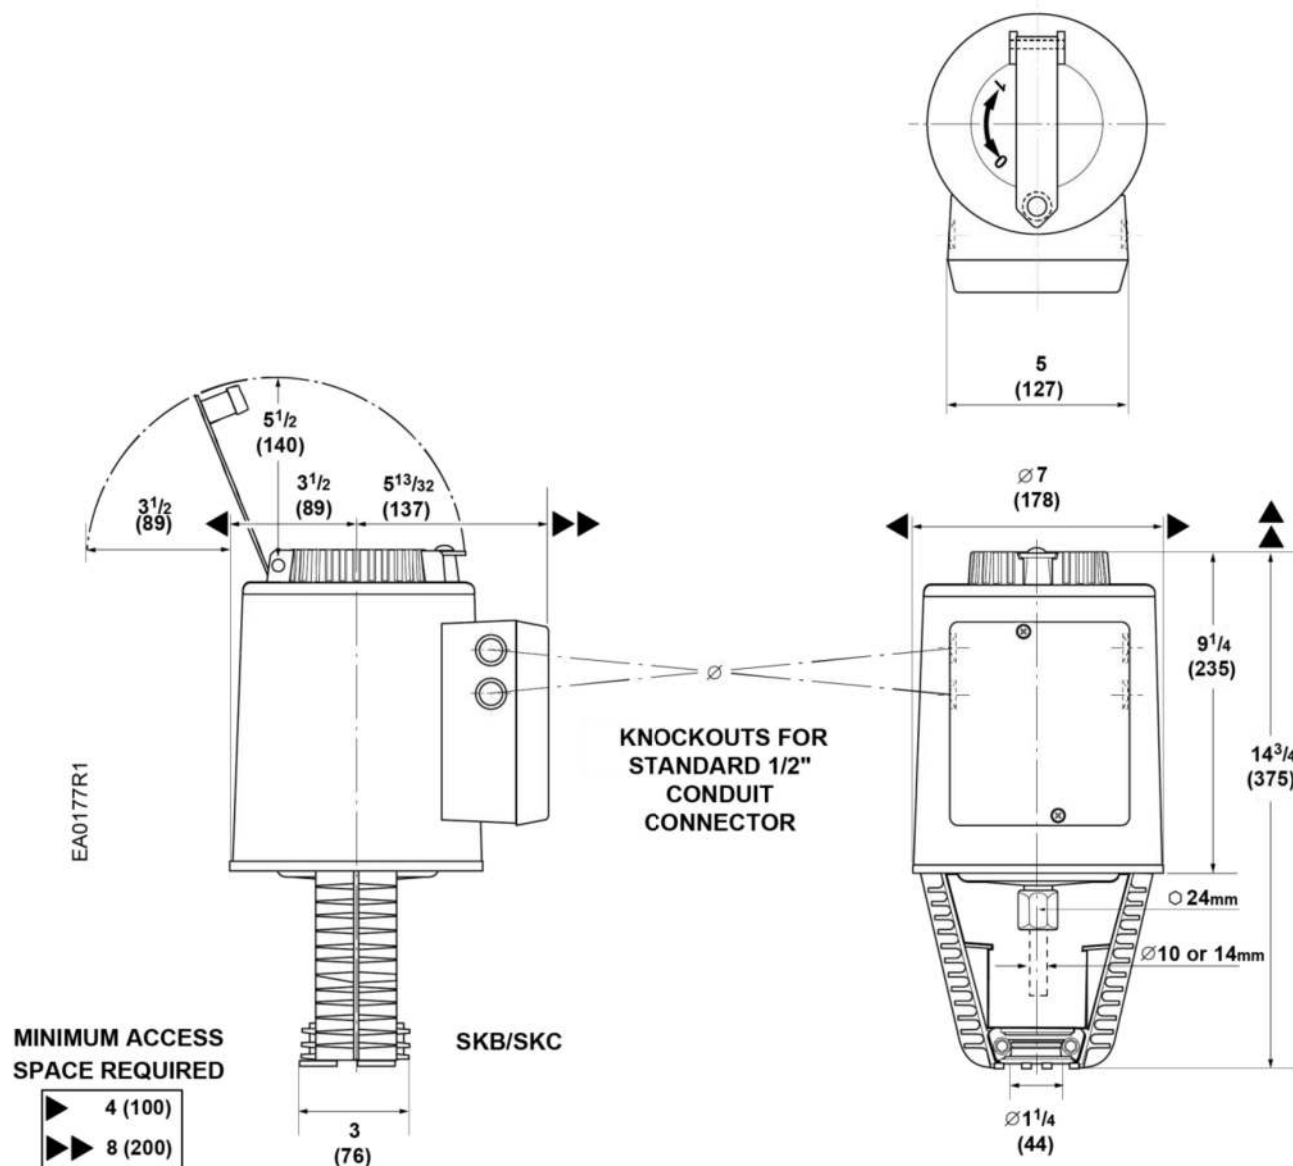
Dimensions of SKB/C in Inches (Millimeters).
